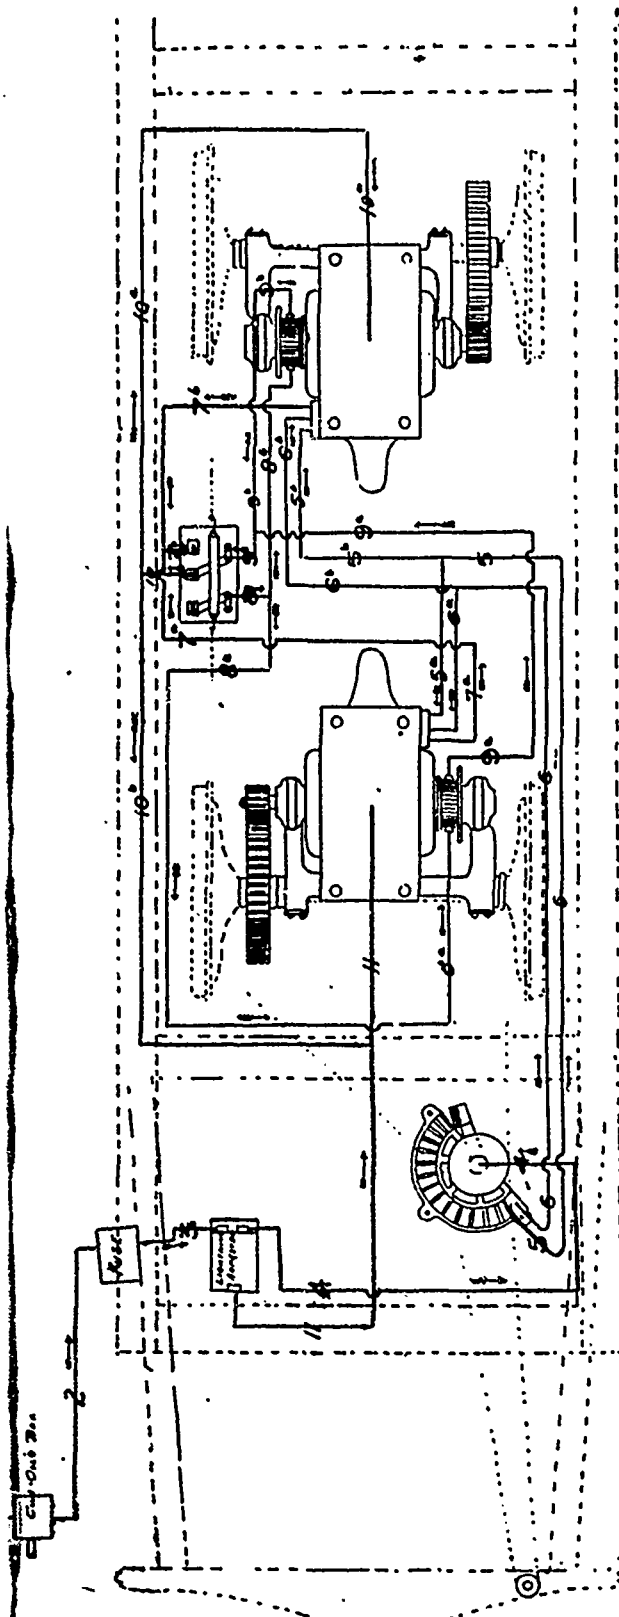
DIAGRAM OF WIRING THOMSON-HOUSTON MOTOR CAR.—Single Reduction Gear.
